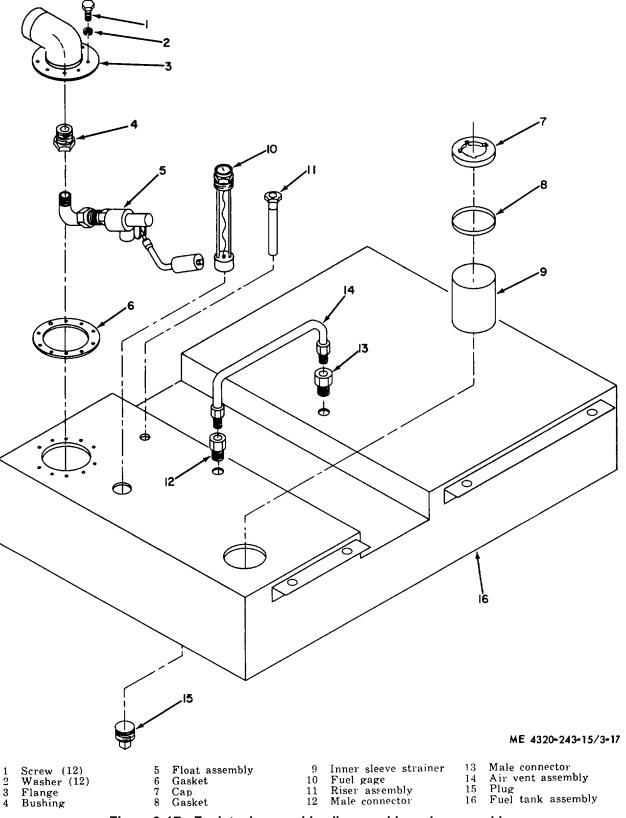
Fuel tank assembly, disassembly and reassembly.
